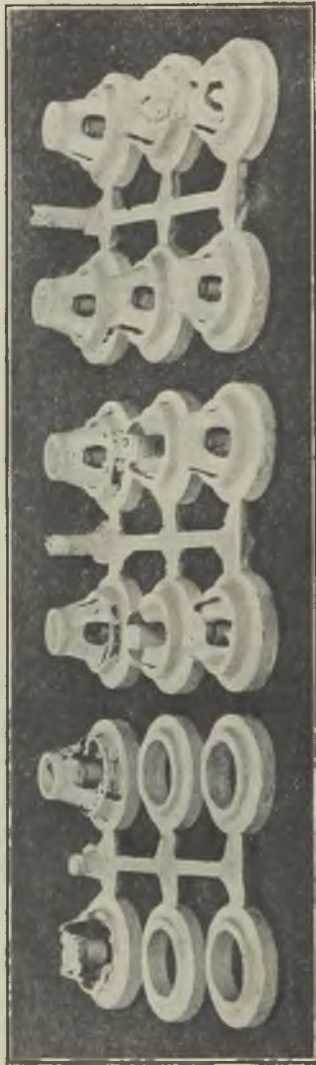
A TYPICAL EXAMPLE OF SHORT RUN CASTINGS.
